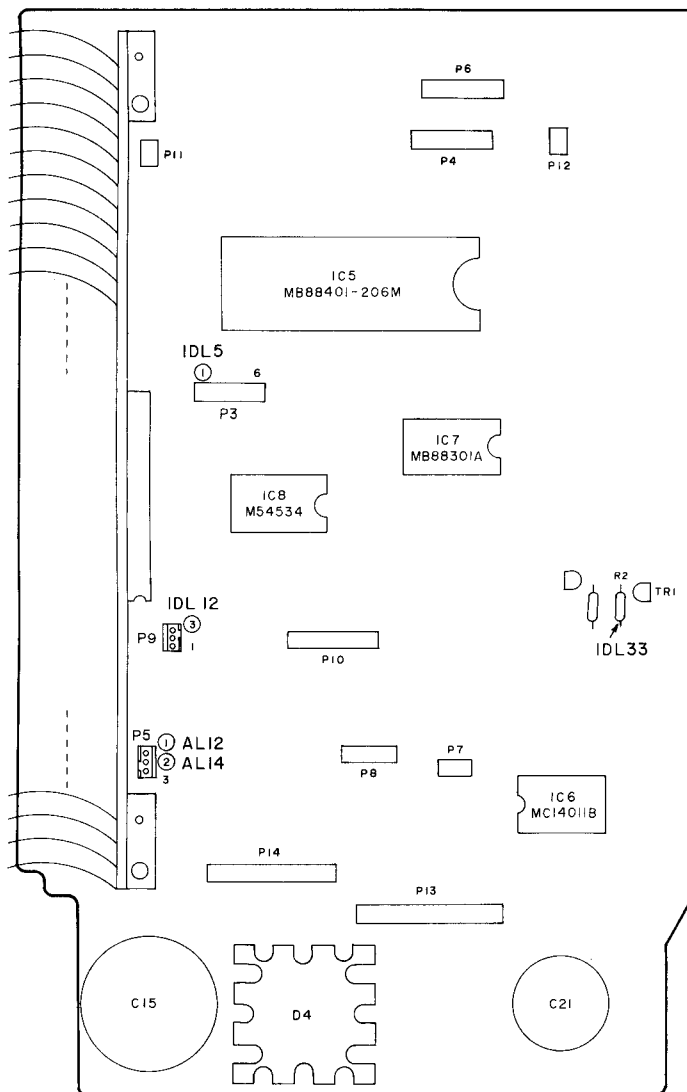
Top View of Power & Syscon P.C. Board.
